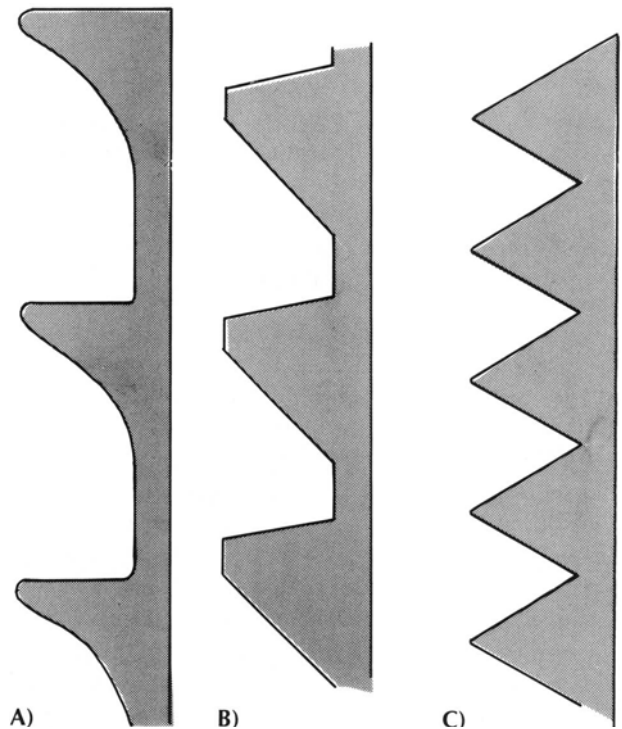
Screw thread types include modified (A), buttress (B), and v-shaped (C).
